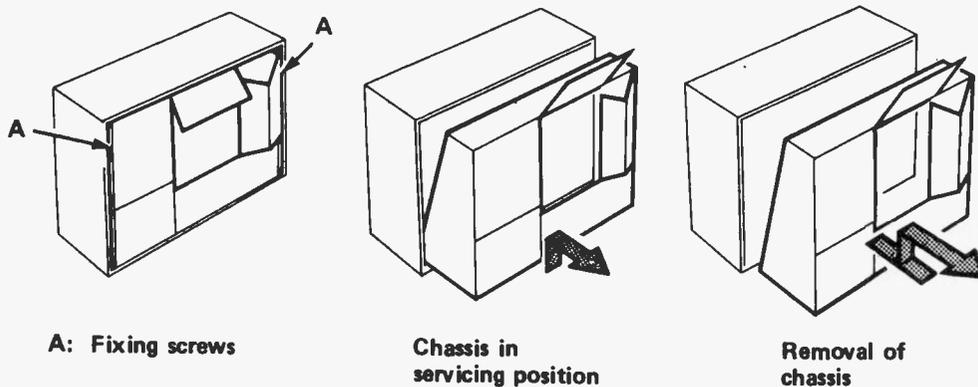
(left): Method of lowering and removing the chassis. The bottom of the chassis is supported on nylon rollers: make sure that they are in their runners before withdrawing the chassis too far – otherwise you could end up with a cracked c.r.t. neck.
